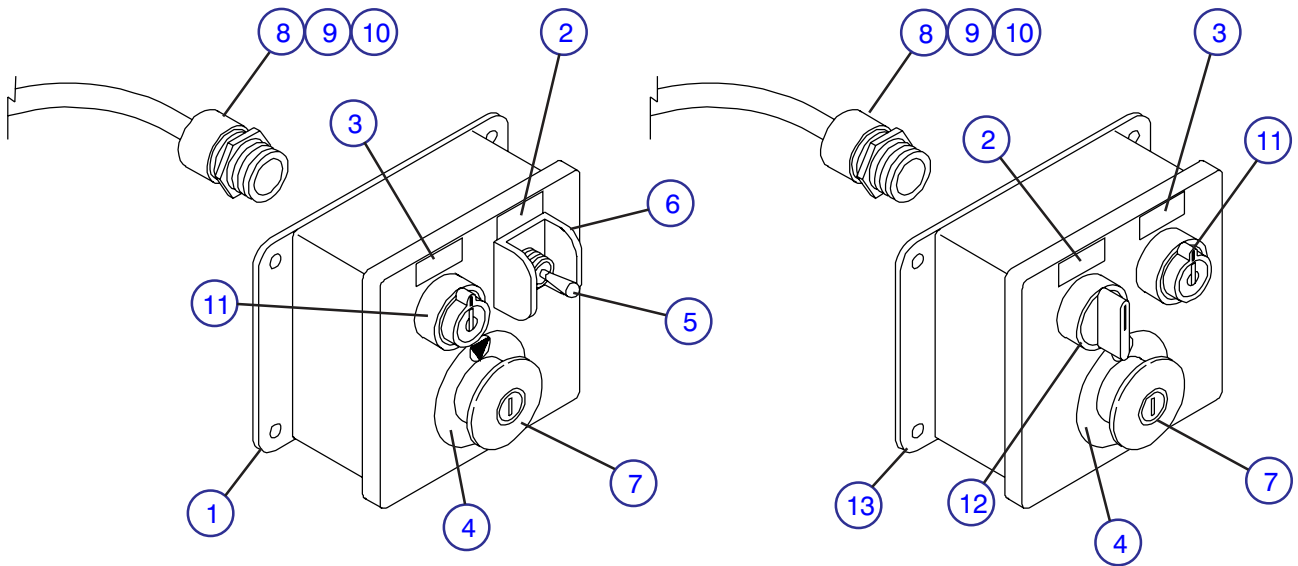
BATTERY CHARGER ASSEMBLY - EE-Rated
